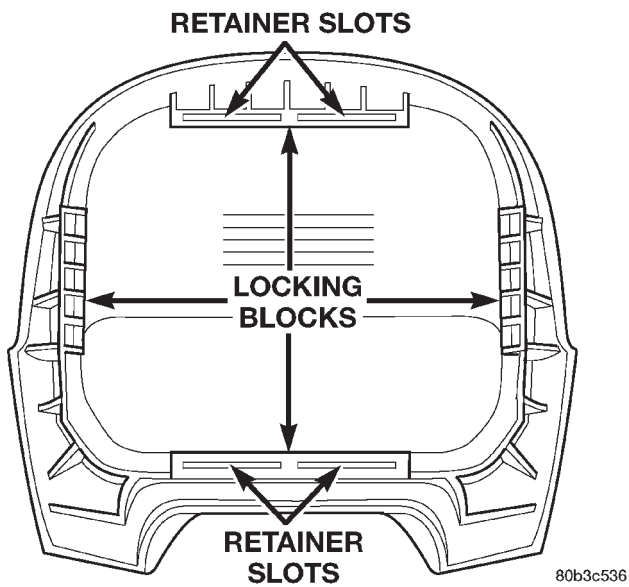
Driver Side Airbag Trim Cover Remove/Install INSTALLATION
